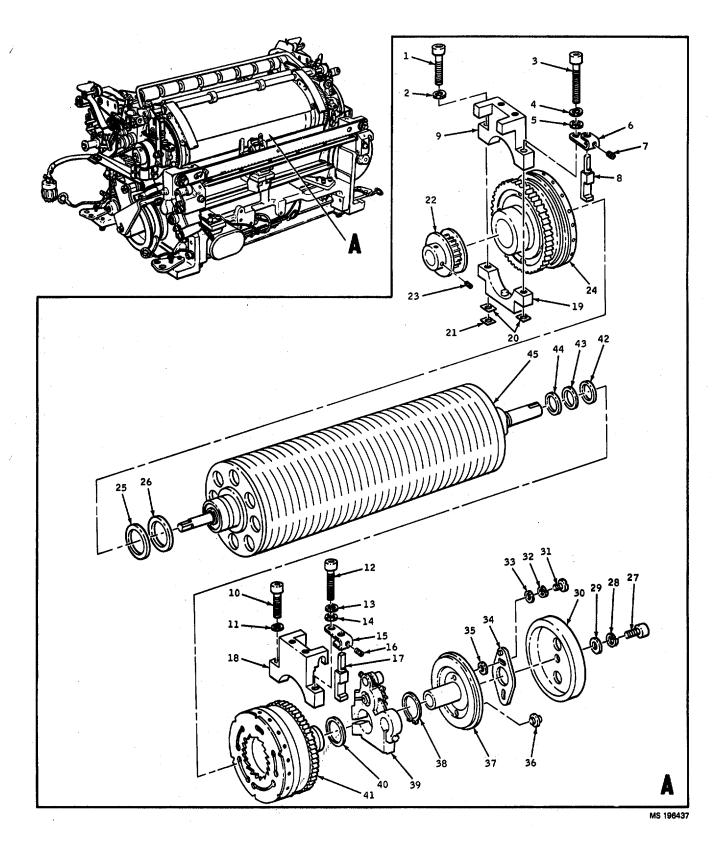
Print Drum and Timing Mechanism, Exploded View (Sheet 2 of 2)
